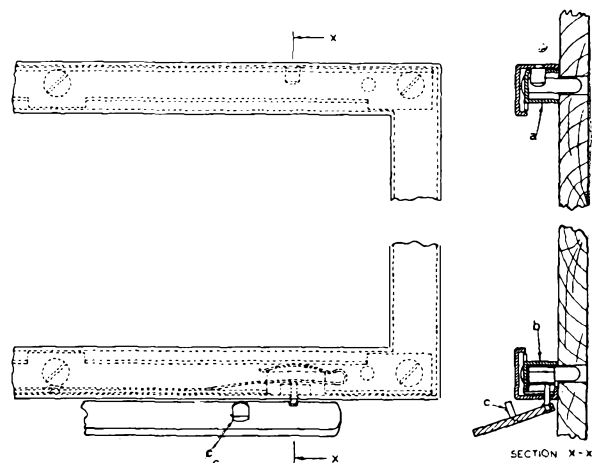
CONSTRUCTION OF NOTICE FRAME.
